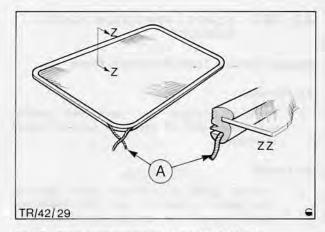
Glass, weatherstrip and drawcord assembly A – Cord
